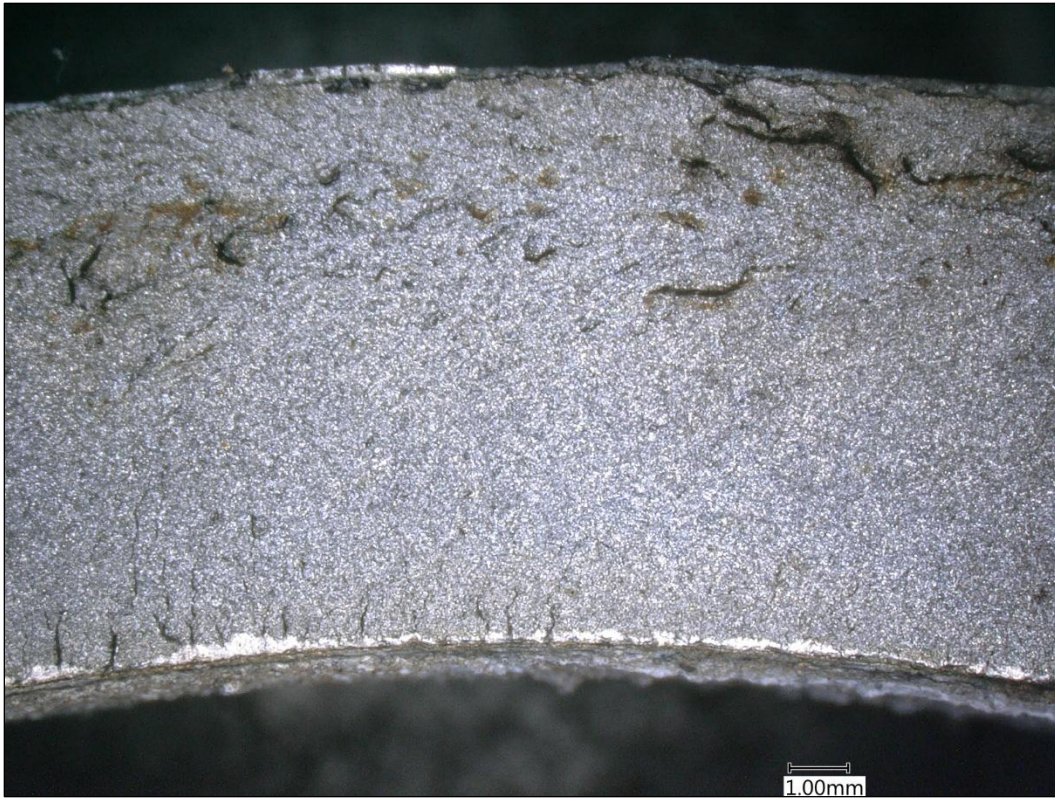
Reference 23 brittle fracture heading toward fatigue zone.
